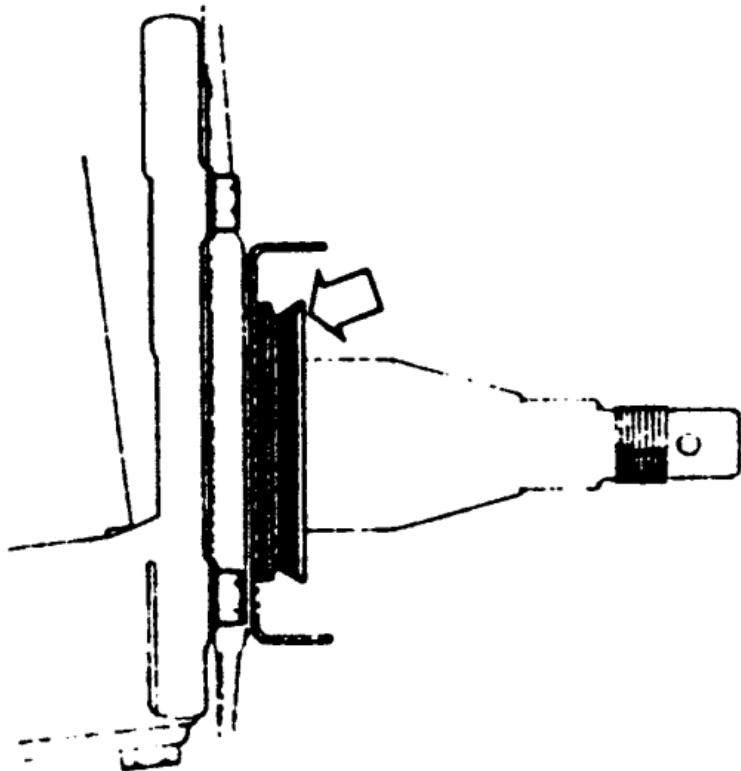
Press the sealing ring onto the spindle before installing the hub assembly
